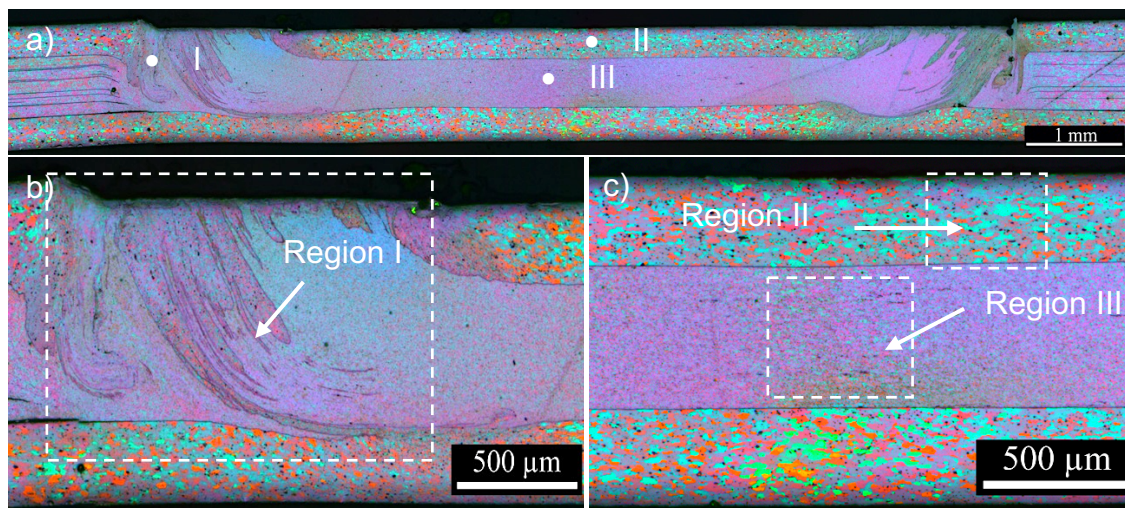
(a) cross-section of multilayered weld processed with the baseline condition:  $RS=1100$  rpm,  $PS=2.1$  mm/s, and  $PD=0.7$  mm. (b) and (c) represent higher magnifications of the cross-section at the region penetrated by the adjustable shoulder and at the center of the weld, respectively.
